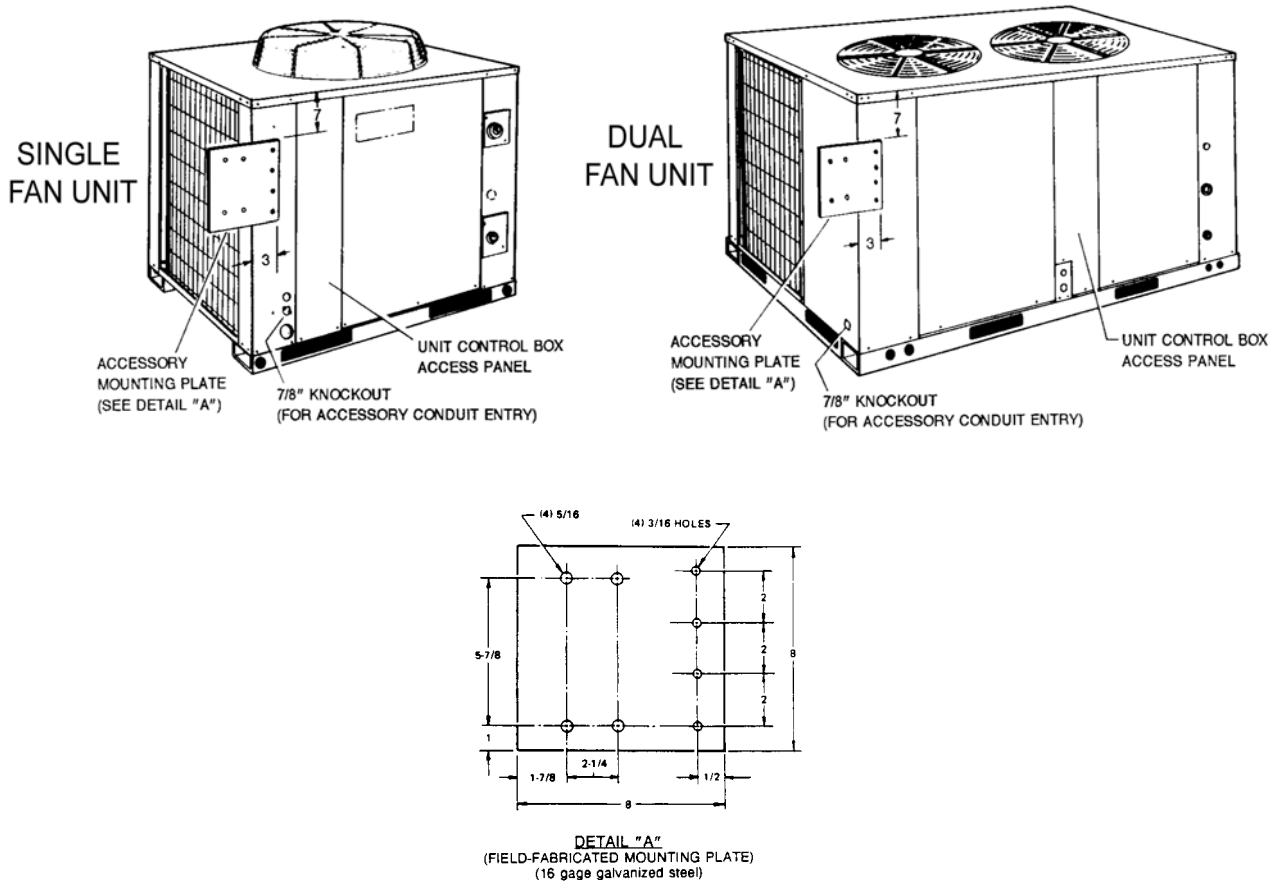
ACCESSORY MOUNTING PLATE LOCATION
